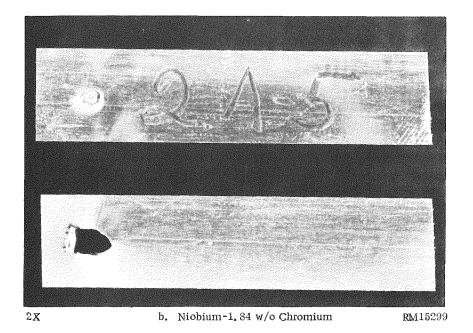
EXAMPLES OF TYPICAL FAILURES IN SPOT-WELDED TENSION-SHEAR TEST SPECIMENS
